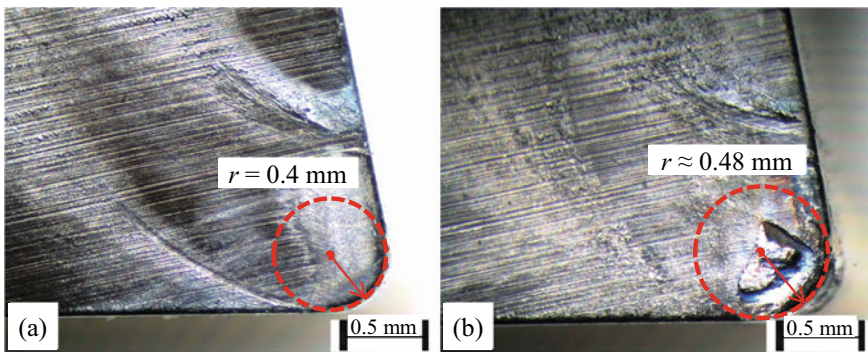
Measurements of tool nose radius and surface condition of CVD TiCN/ Al_2O_3 composite ceramic carbide insert a before and b after machining
